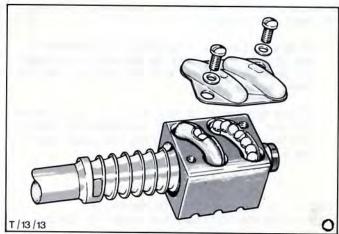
Remove transfer tube and sixty-two (62) steel balls.
